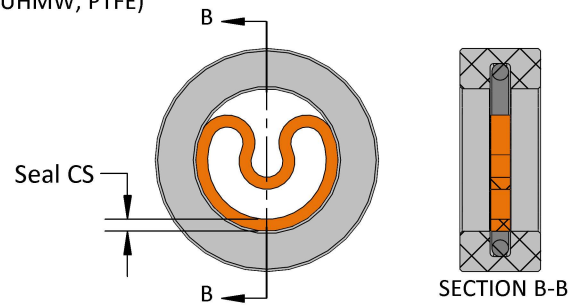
Deform the PTFE seal into a kidney bean shape so it will fit into the housing bore
